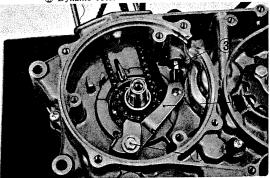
① Bolt ② Cam chain tensioner arm ③ Adjusting bolt
